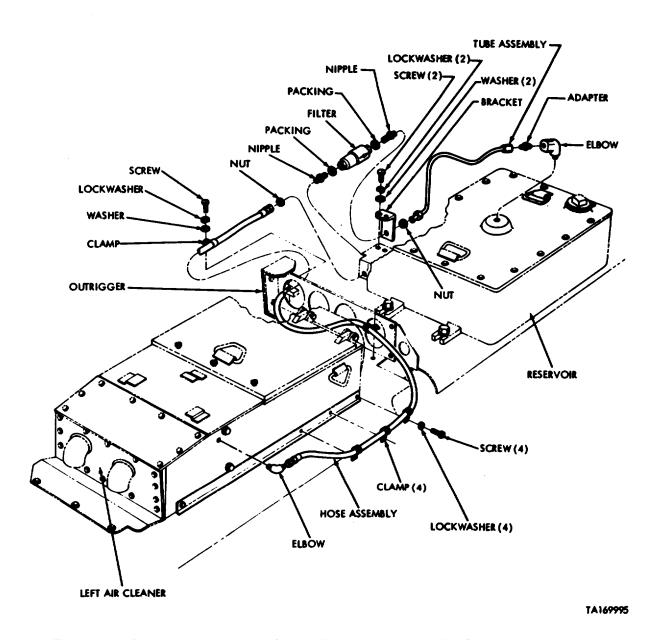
Removal or nstallation of hydraulic reservoir air vent line filter and attaching parts.
